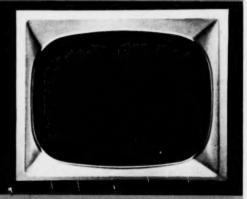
Finished styrene copelymer mask for 21-in, television. Sheet is trimmed after forming; mask is spray painted
